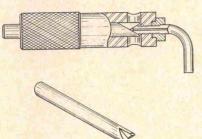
Tool for refinishing the conical ends of high pressure tubing.
